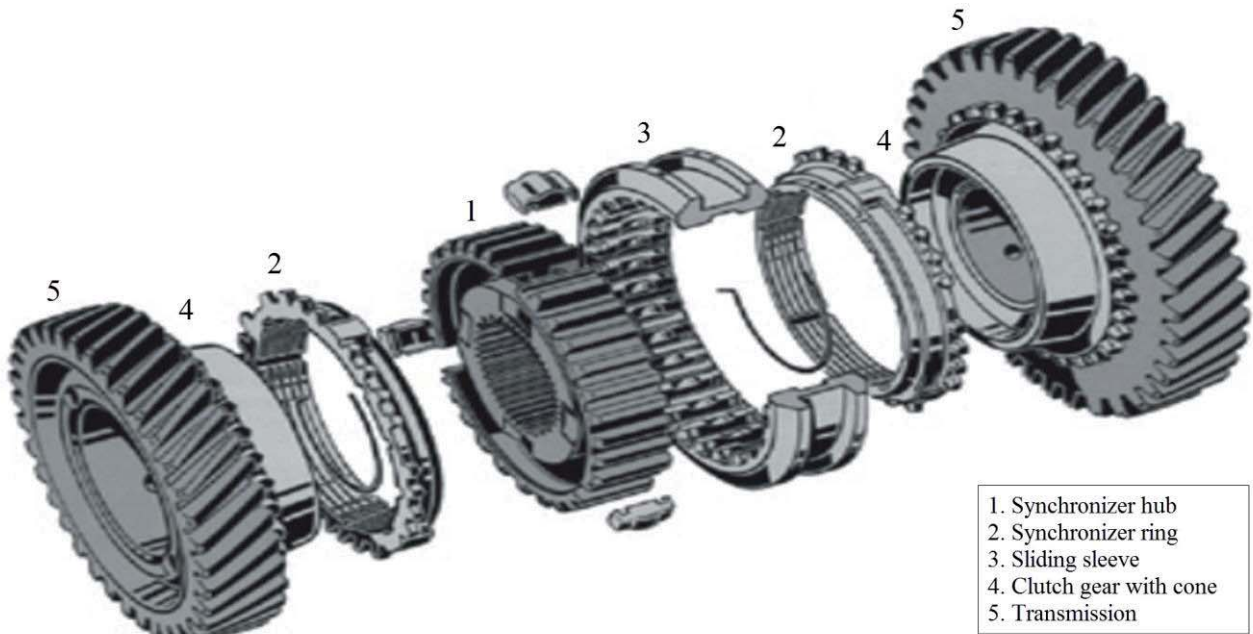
Synchronization module parts manufactured by PSM in gear boxes
